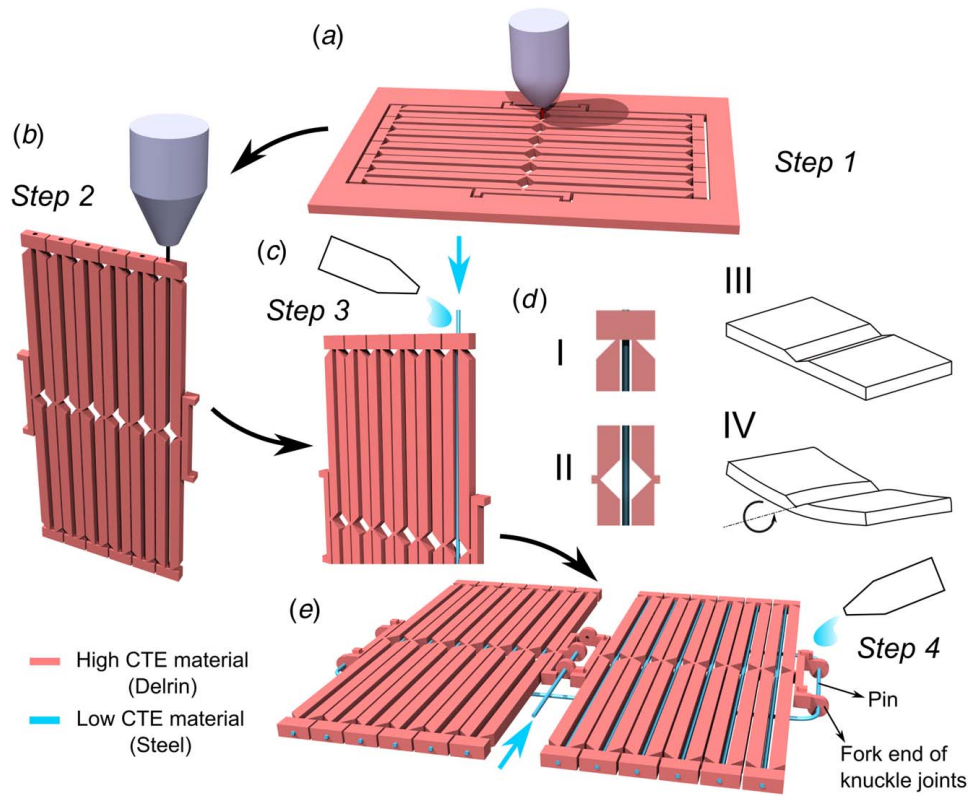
Fabrication process of proofs-of-concept: (a) laser cutting, (b) drilling via milling machine, (c) insertion and fixation of steel wires, (d) notch joints of a L-unit (I and II) as well as sketches of notch joints before (III) and after (IV) thermal deformation, and (e) fixation of flakes with fork end of knuckle joints and assembly of hierarchical proof-of-concepts
